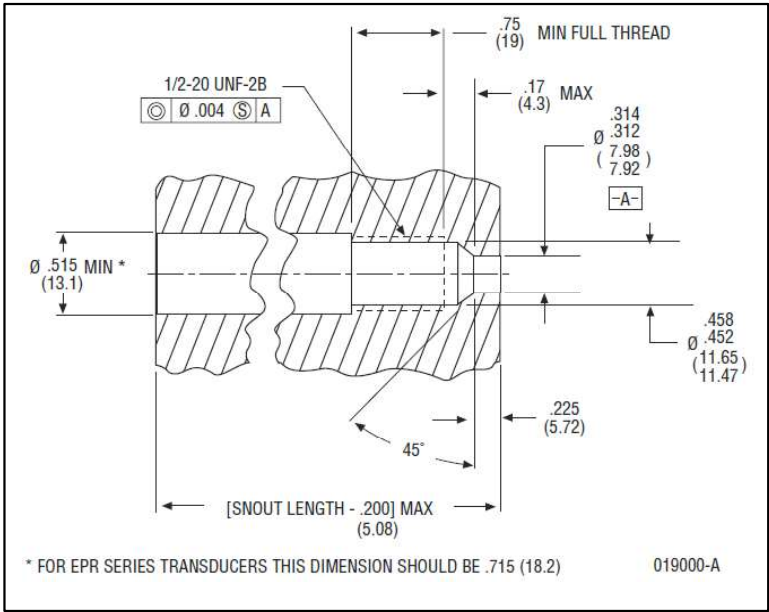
Mounting hole details for the standard Dynisco thread [23].
